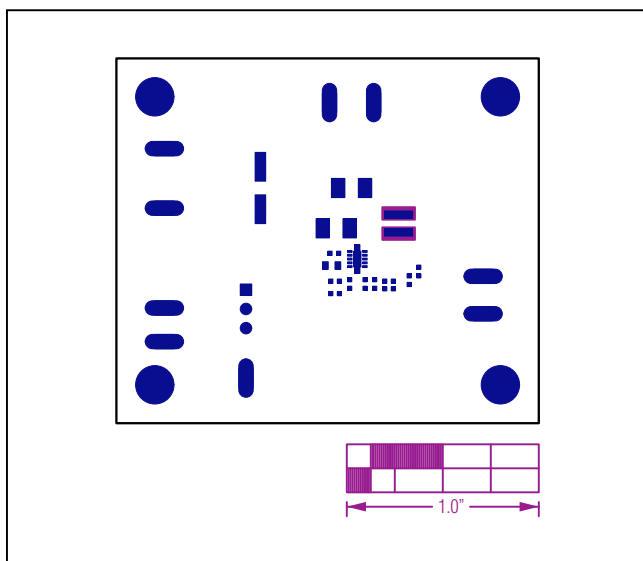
MAX17542G 3.3V Output EV Kit Component Placement Guide—Top Solder Mask
